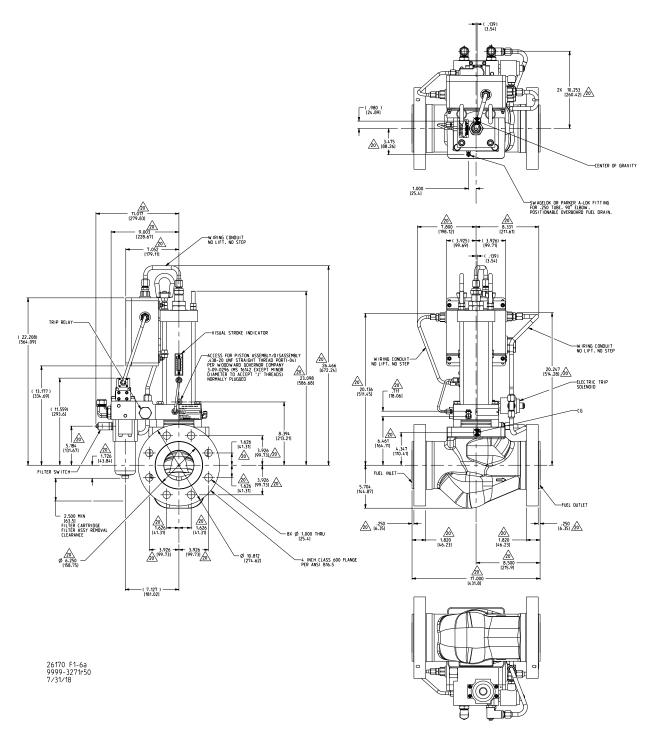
Outline Drawing, 4" Gas Fuel Throttle Valve (Low-pressure, Class 600 Version, Actuator Rotated 180-Degrees)
